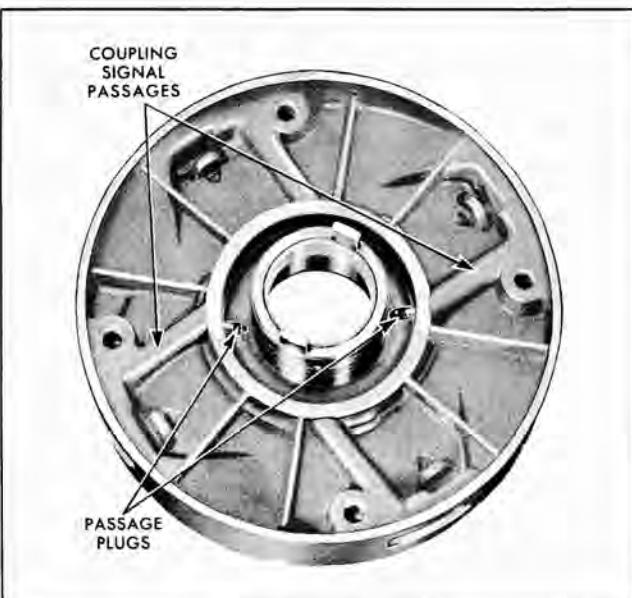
Plugs in Exhaust Valve Signal Oil Passages in Coupling Cover
